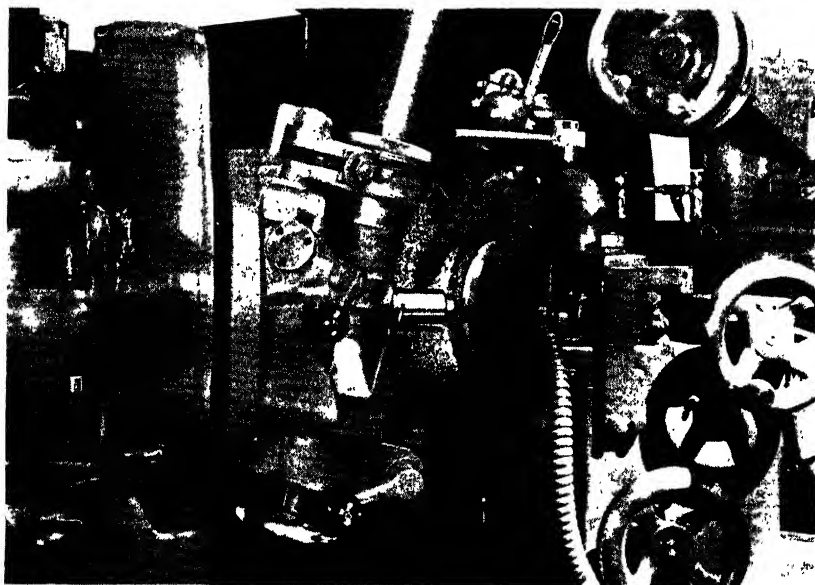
Grinding All Three Trunnions of Propeller Shaft
